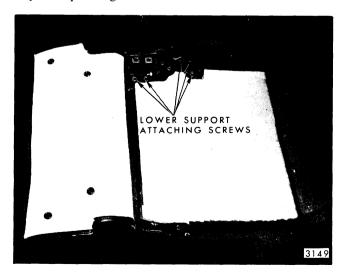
Auxiliary Seat Lower Support - Cadillac Limousine Styles
